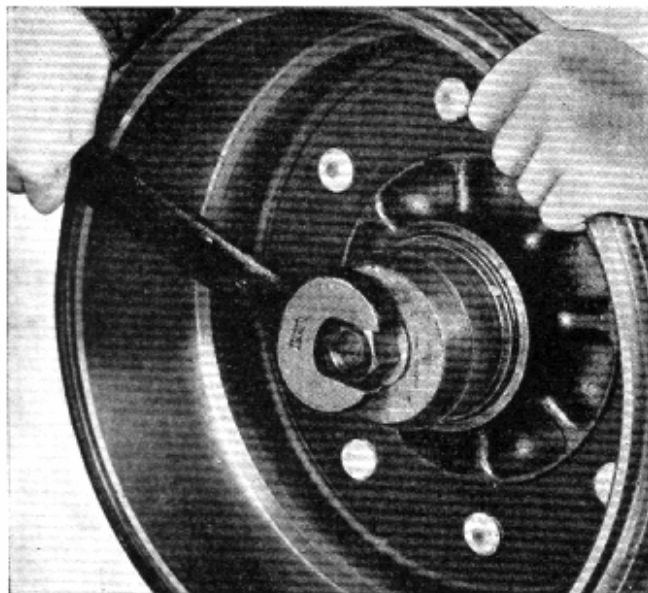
Using Tool No. X-1239-B Inverted to Install the Grease Slinger and Oil Seal
